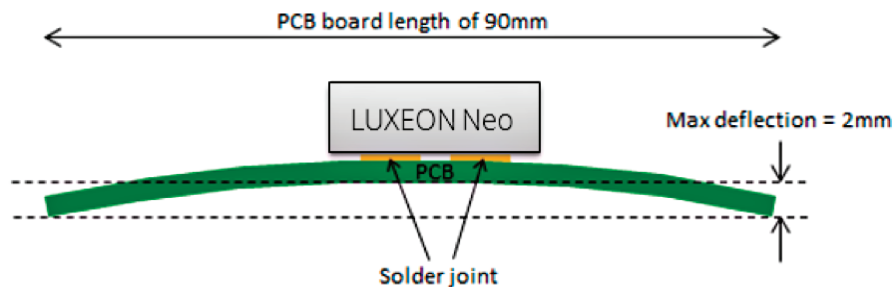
Maximum PCB bending guideline to prevent damage to the LUXEON Neo package
